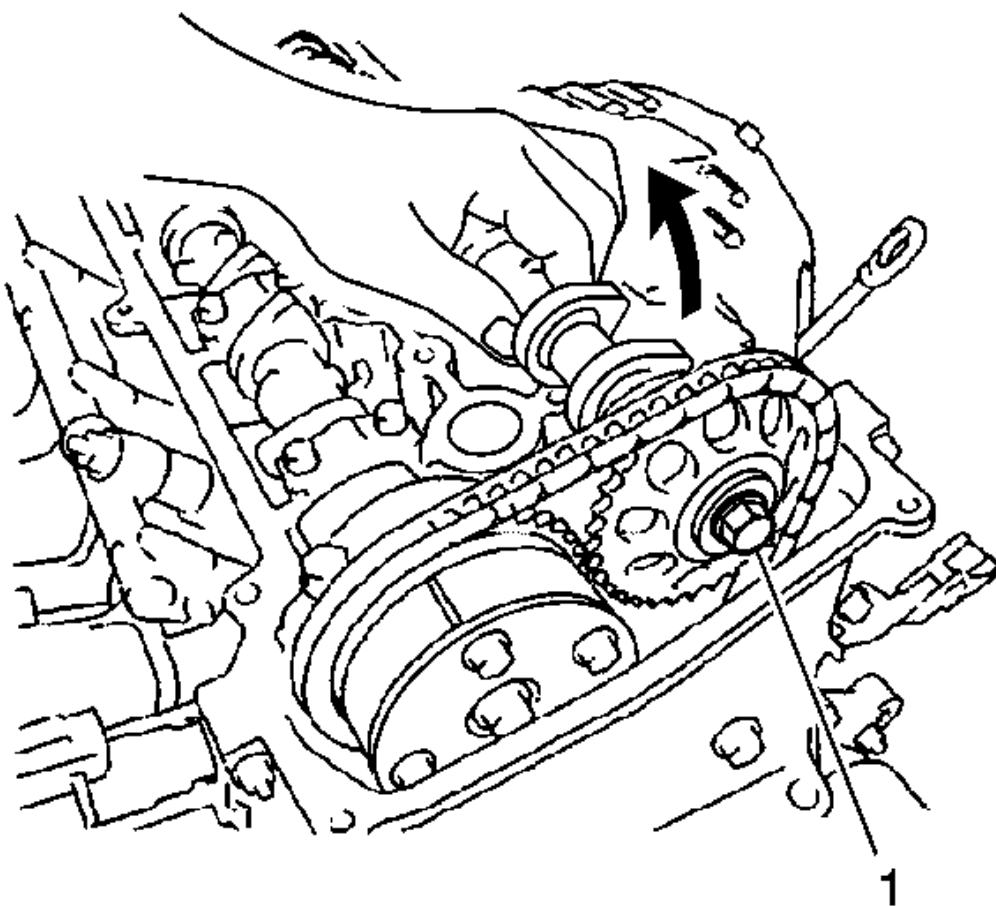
View Of Camshaft Timing Sprocket & Set Bolt
